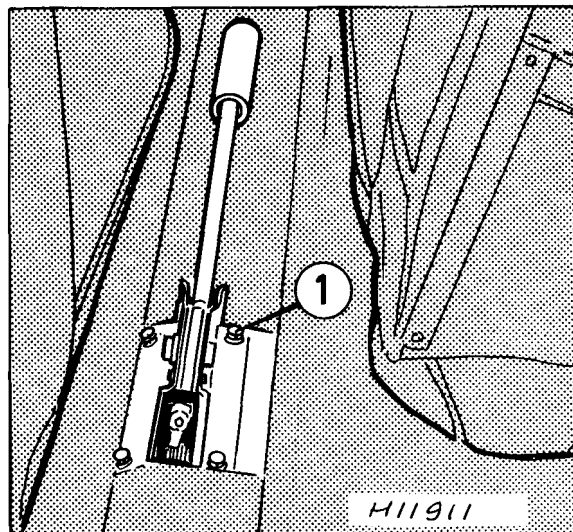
Handbrake control lever mounting bolt (1) (Sec 18)
